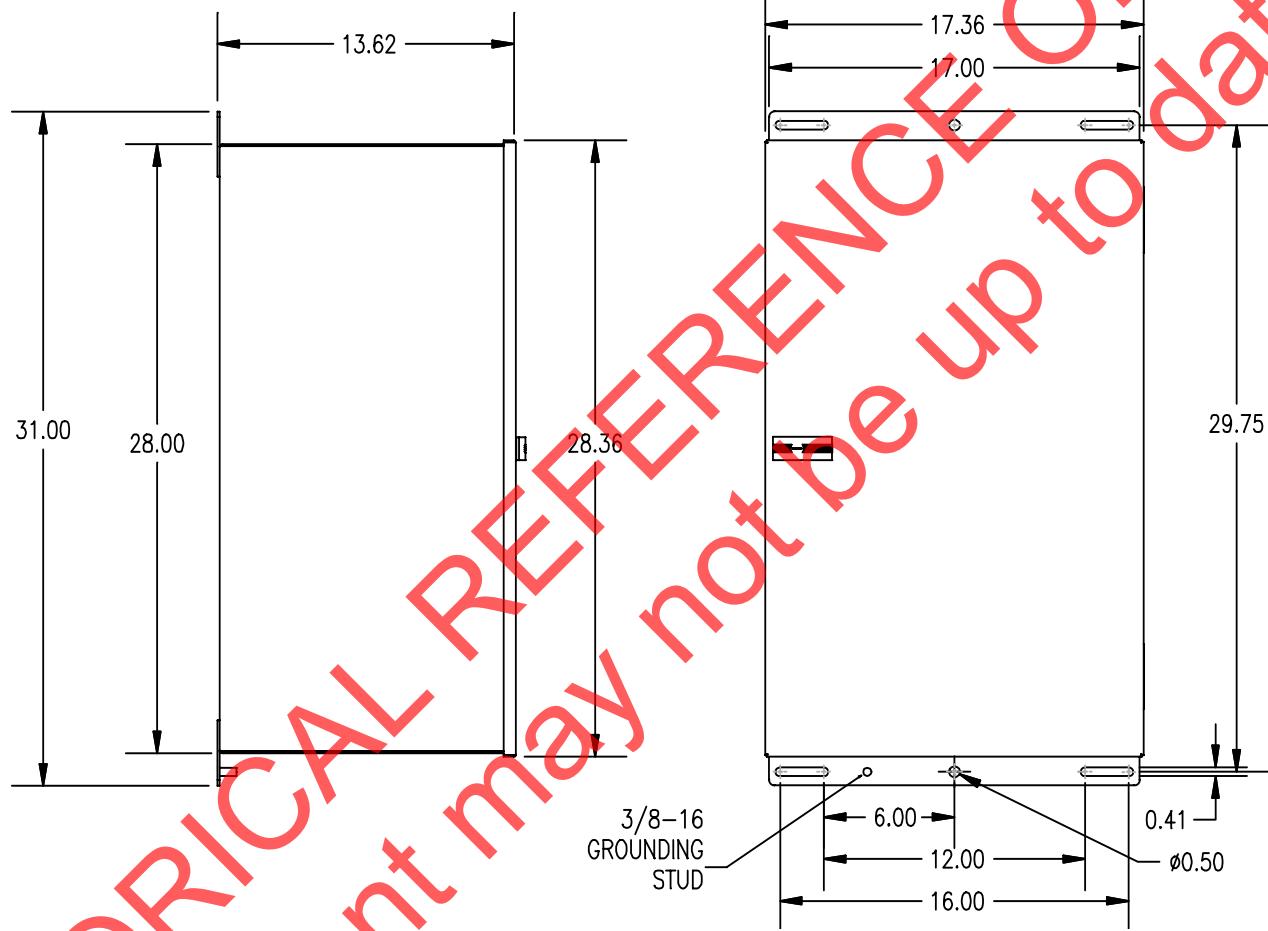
UVIC Cabinet Dimensional Outline Drawing
